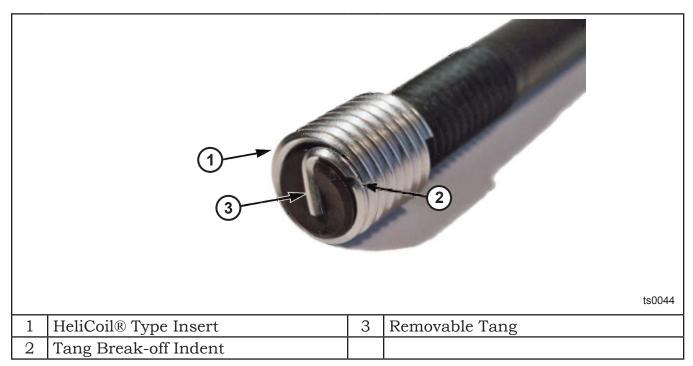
HeliCoil® Type Threaded Hole Repair Insert
